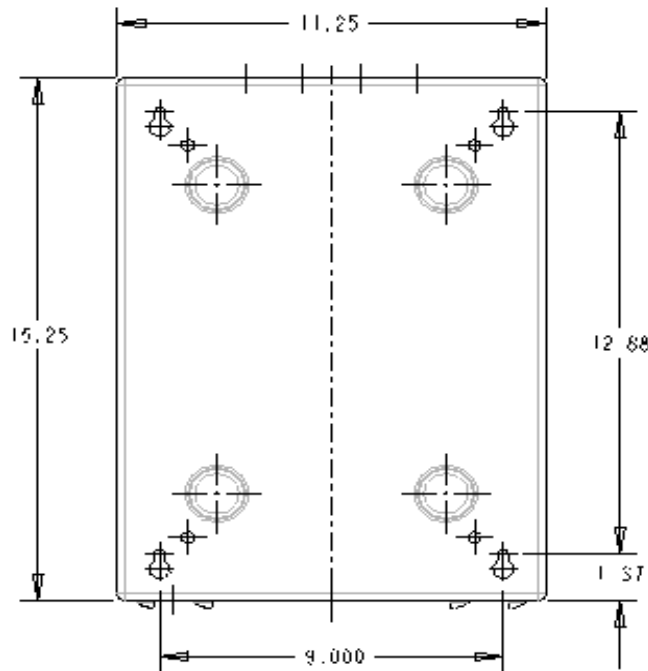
Dimensions to mount the Wet Section. (All dimensions in inches)
